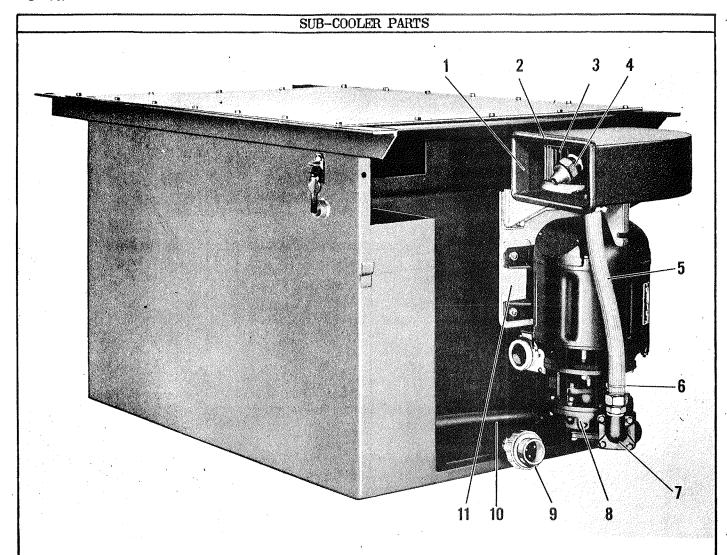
SUB-COOLER PUMP AND FAN ASSEMBLY
